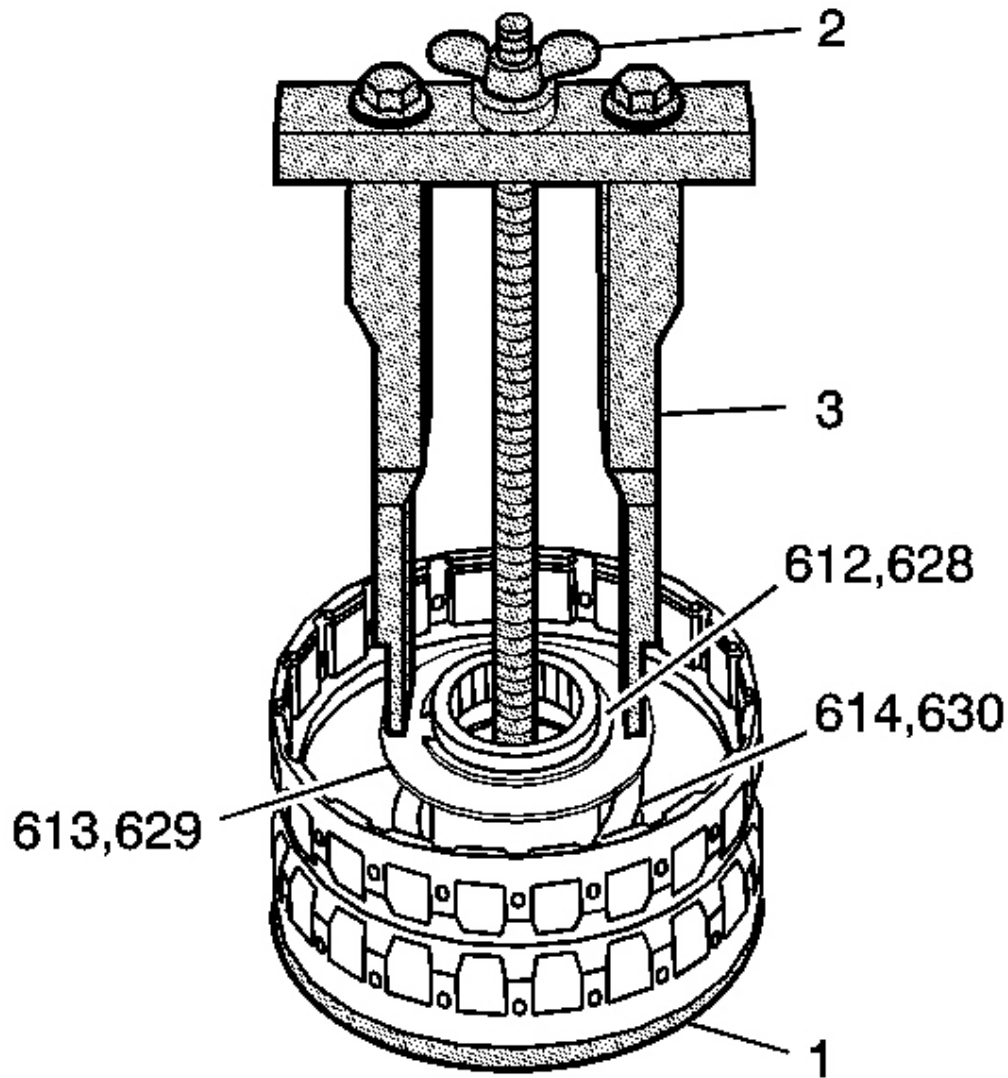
J 45124, J 23327, Clutch Piston Return Spring, Retaining Ring & Clutch Spring Retainer Cap
